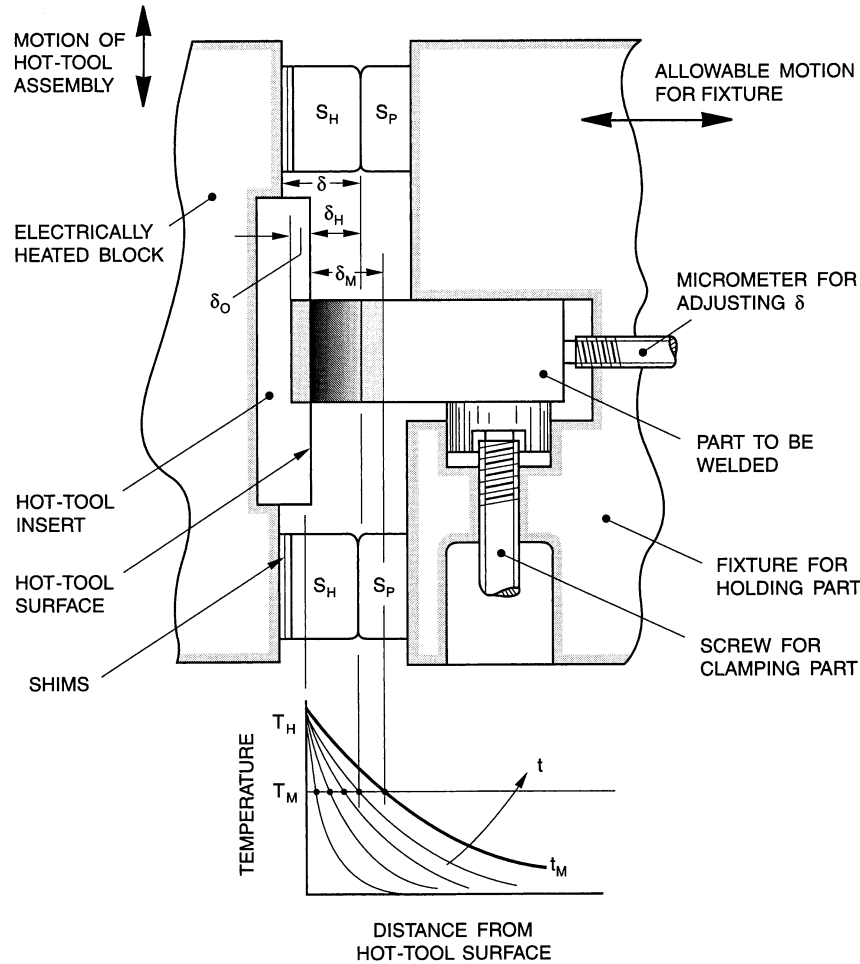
Schematic diagram showing geometric parameters for displacement-controlled hot-tool welding using mechanical stops.
